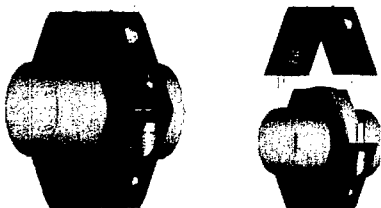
Radial Wedge Flange Clamp – Assembled (left) and Partially Disassembled (right)
